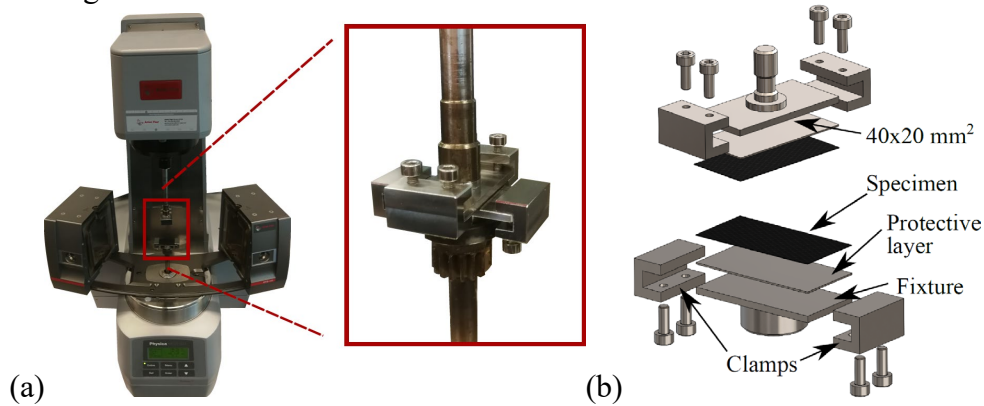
Test setup mounted in an Anton Paar MCR501 rheometer (a) and (b) exploded view of the test setup with top and bottom fixture featuring direct connections for the rheometer.
